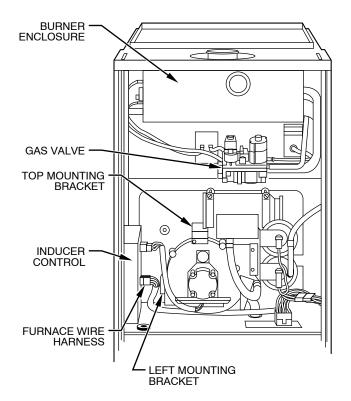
Inducer Motor Assembly in Upflow Furnace
